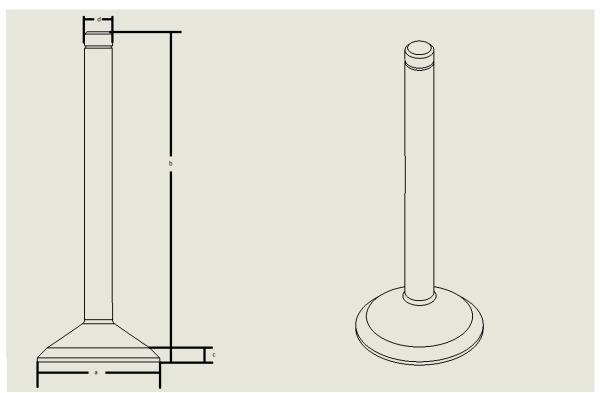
Solid model of valve for dimensions. Groove along top holds spring retaining plate.
